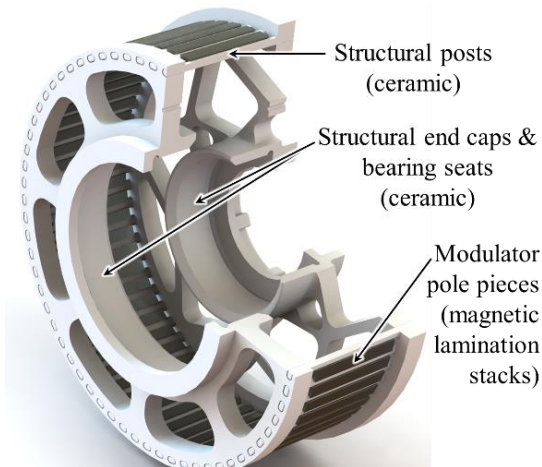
Modulator subassembly for the proof-of-concept actuator's magnetically-geared motor
